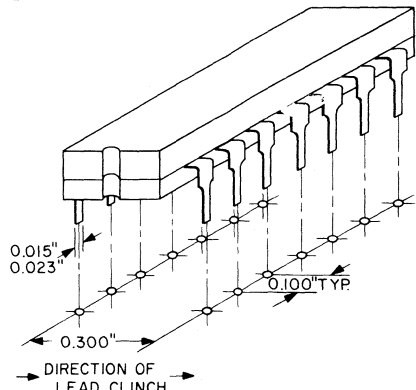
Mounting arrangement for RCA dual-in-line packages.
